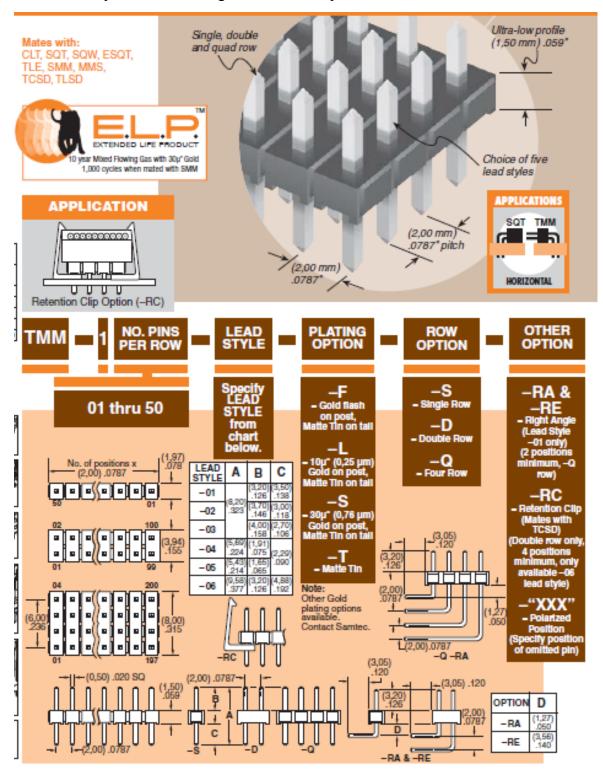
TMM Board-to-Board Electrical Connectors (image courtesy of http://www.samtec.com/technical-specifications/Default.aspx?SeriesMaster=TMM)
